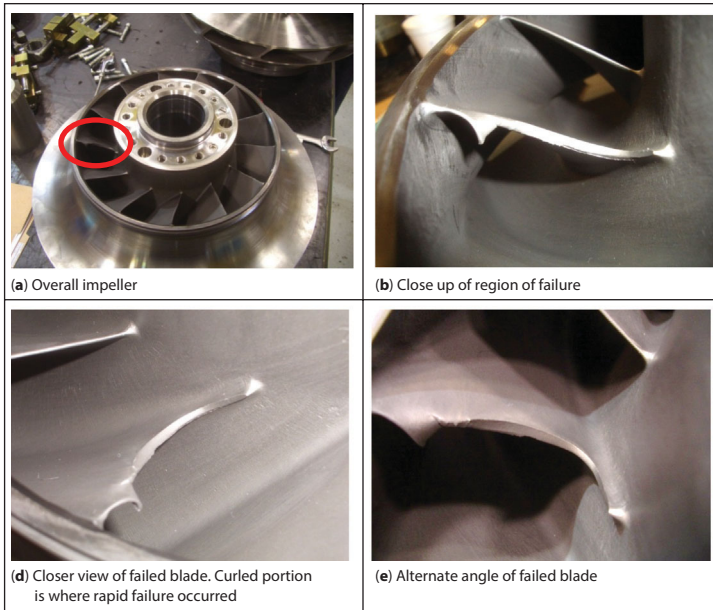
Example of a fatigue failure on a compressor wheel.
